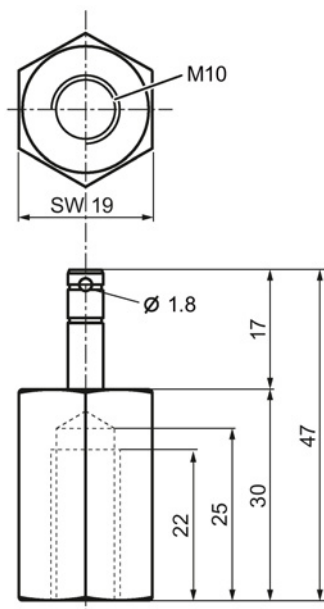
Dimension drawing of quick change holder 6GT2690-0AH10
